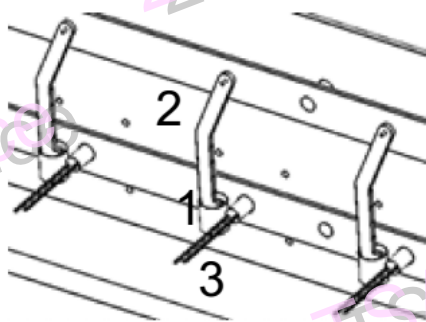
Peelling unit mechanism: 1, blade; 2, spring arm; 3, holder.
